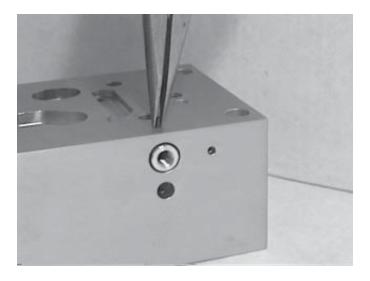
Removing Roll Pin Retaining Shuttle Seat
